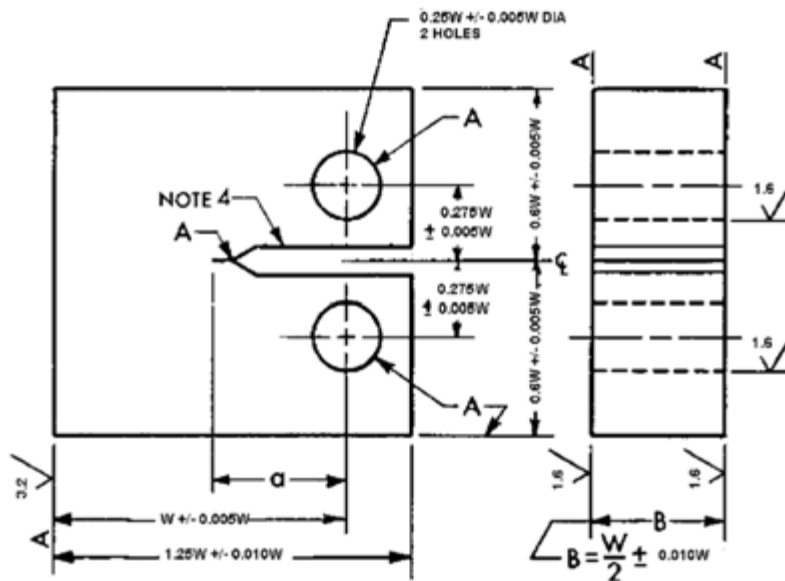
Standard CT specimen for fracture toughness testing [79]
